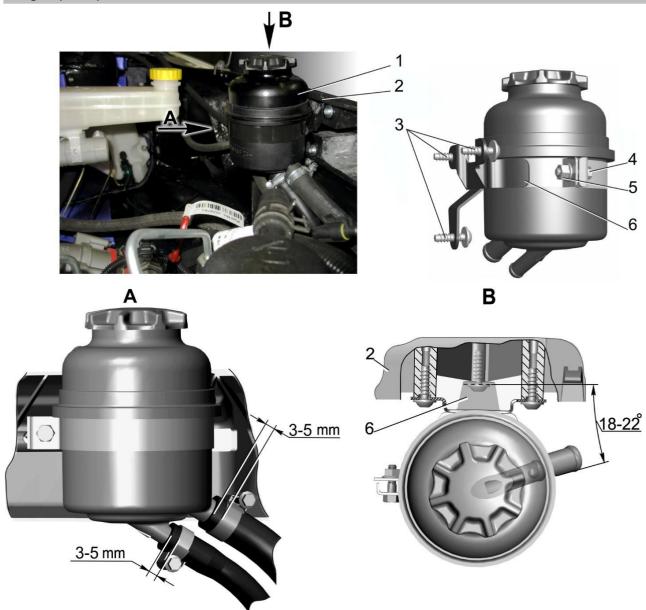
Power steering tank installation: 1 – power steering tank; 2 – frontend; 3 – screws; 4 – bolt; 5 – nut; 6 – bracket
